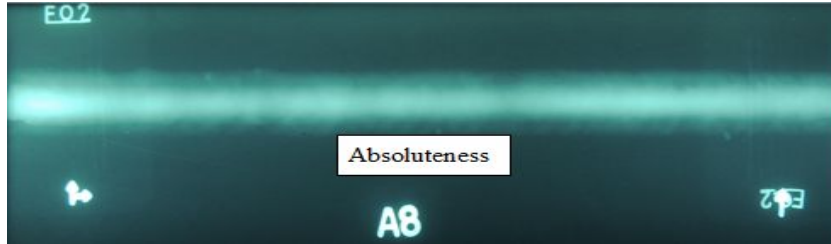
X-ray radiographic test film of shielding gas CO<sub>2</sub> 20% +Ar 80% welding specimen by opening angle 50°
